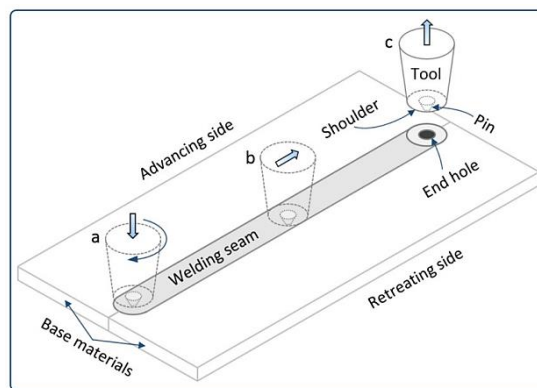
Stir welding process shows the exit hole a) plunger and dwell b) stirrer c) tool withdrawal at the end the weld [51]
